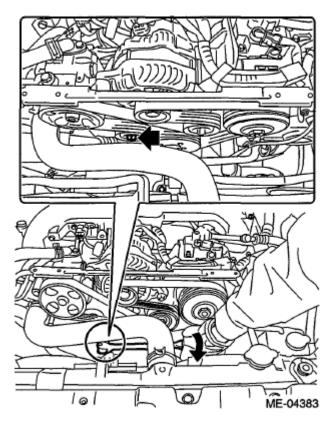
Attaching Tool To V-belt Tensioner Assembly Courtesy of SUBARU OF AMERICA, INC.
